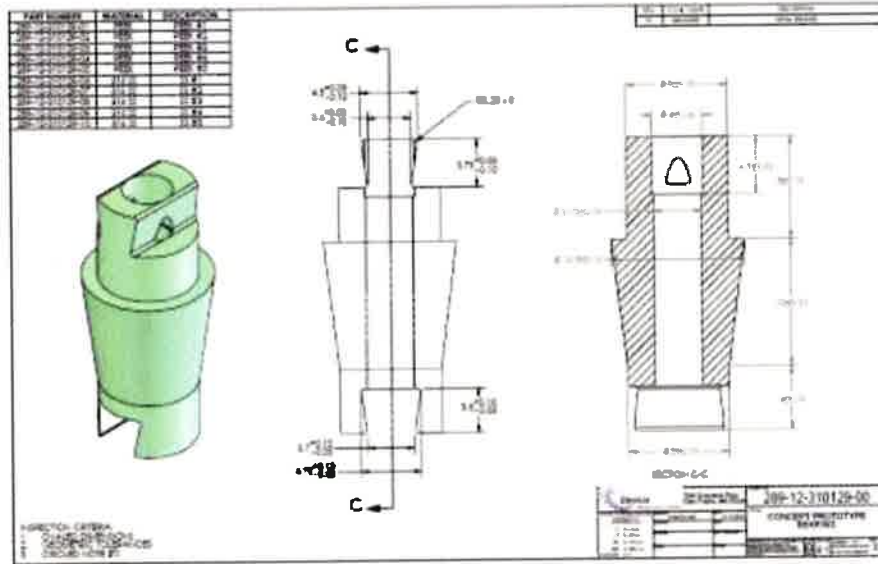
The conical insert was used in the first round of testing at Devicix. Both stainless steel and peek conical inserts were tested.
